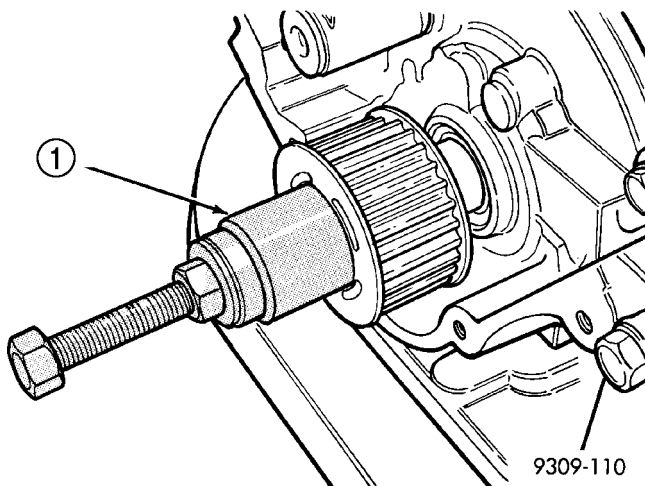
CRANKSHAFT SPROCKET INSTALLATION
